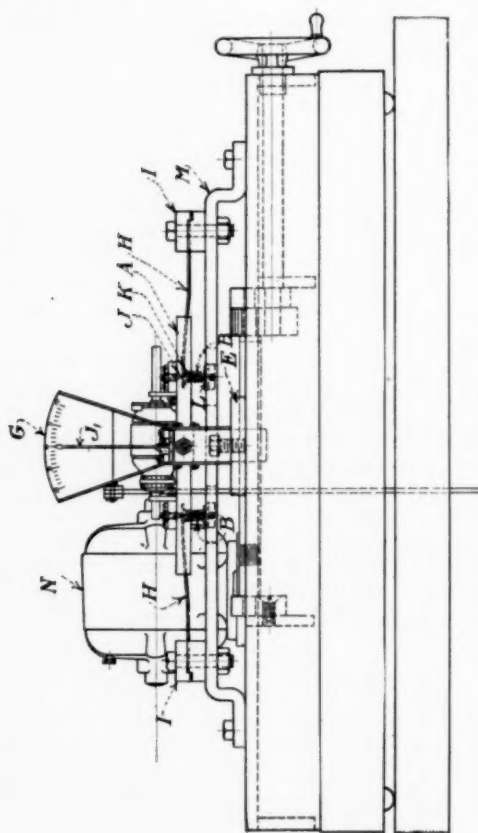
SIDE VIEW OF BALANCING MACHINE WITH MOVABLE FULCRUM
